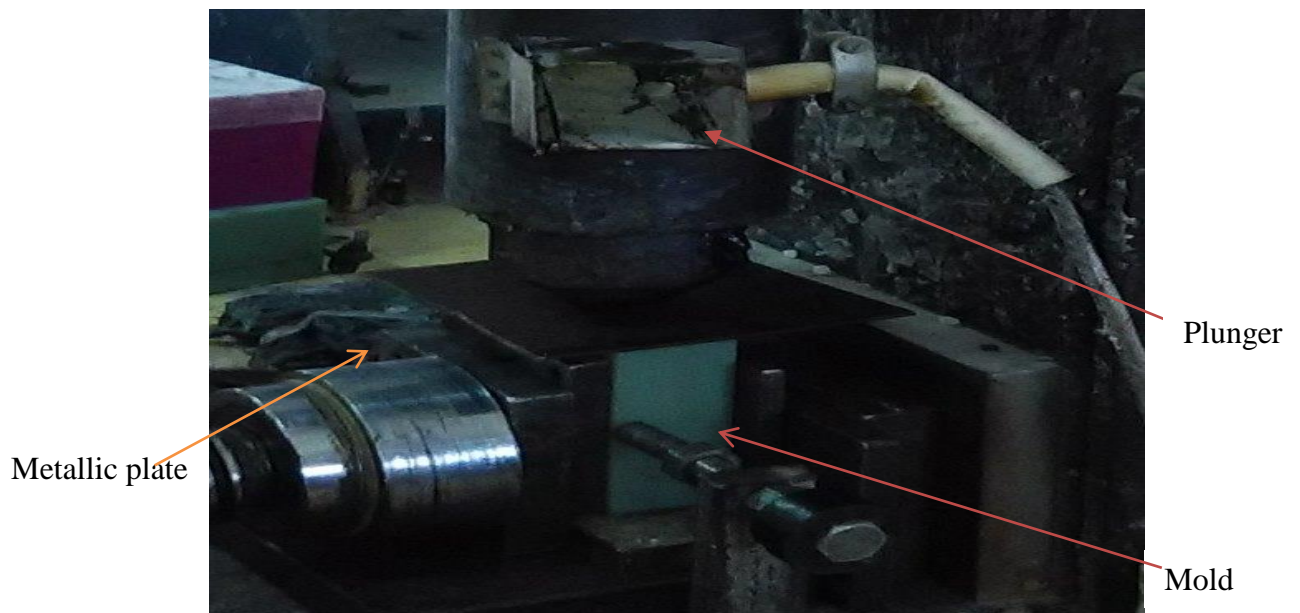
Hand Injection Molding (HIM) Machine for trial
